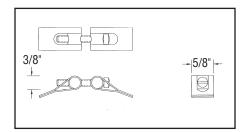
Standard Profile – Barrel Nut Assembly Welded to Sheath with 10-32 Screw.
